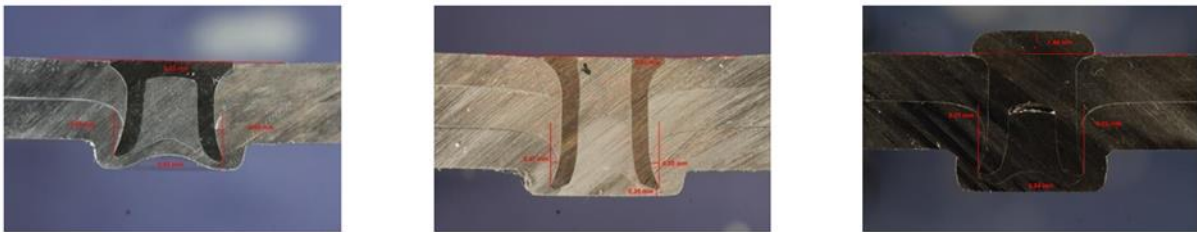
, Images of C-rivet, T-rivet, and PG-rivet
